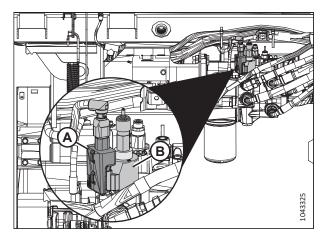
Draper Speed Control Module – Integrated Hydraulic System
